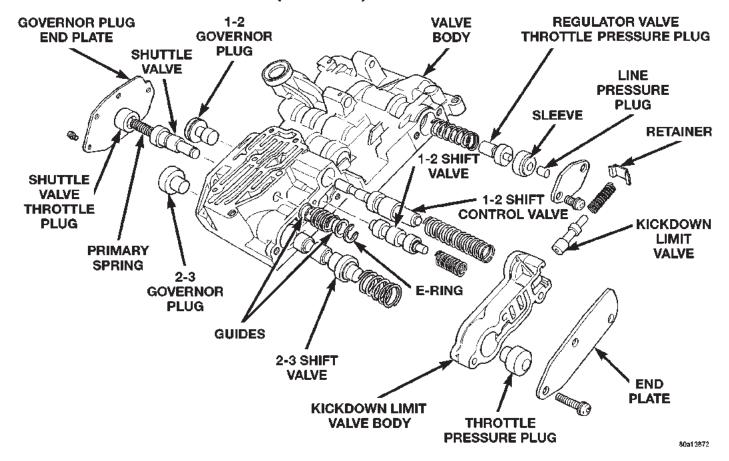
Control Valves, Shift Valves, And Governor Plugs
